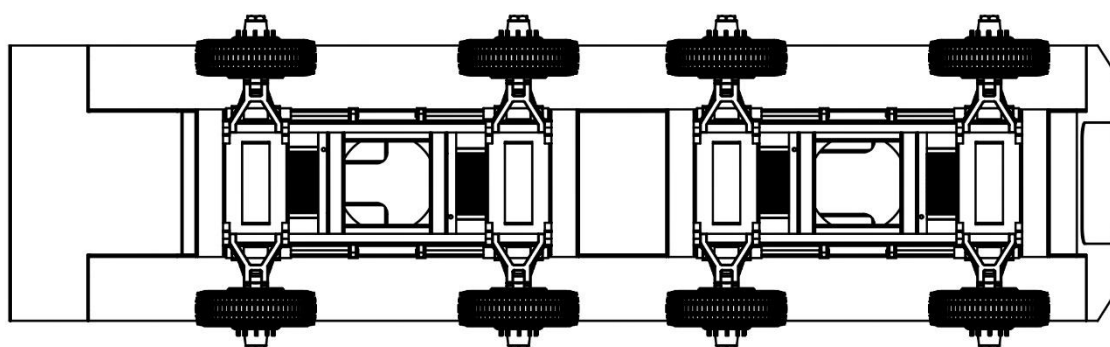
Bottom view of a four-axle armored wheeled vehicle
